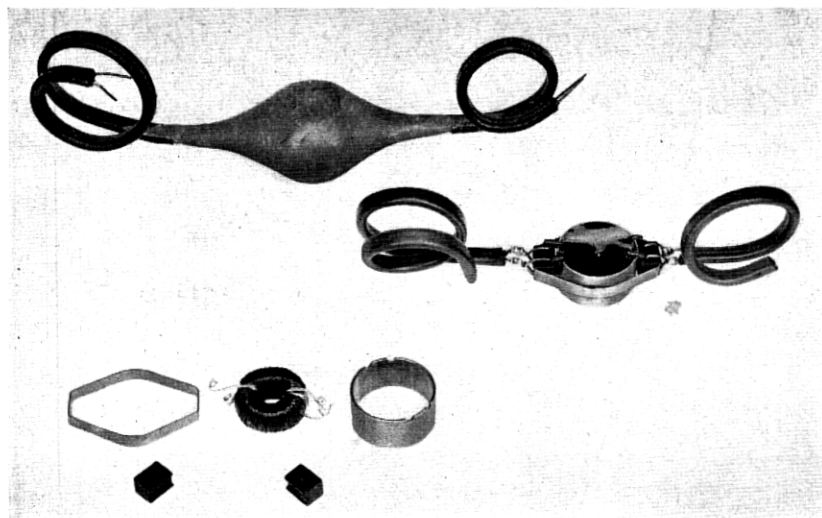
Moulded rubber loading coil case for buried wire loading installations. Views of piece parts, partial assembly, and potted coil ready for installation.
